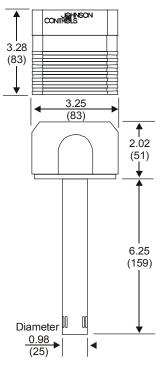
Duct Probe Humidity Transmitter Dimensions, in. (mm)
